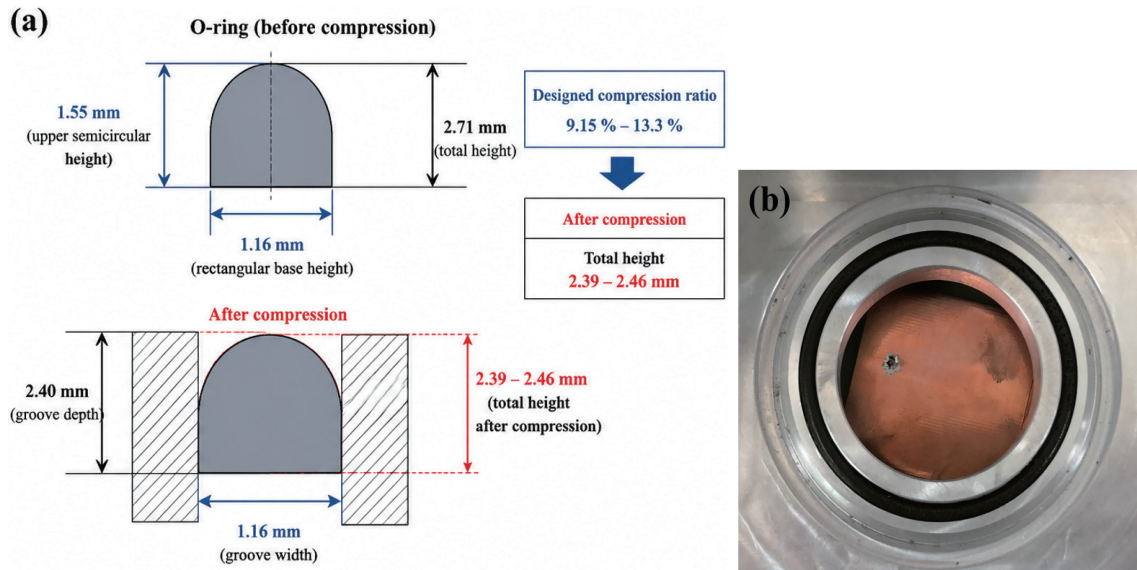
(Color online) (a) Isometric view of the O-ring and (b) photograph of the O-ring placement.
